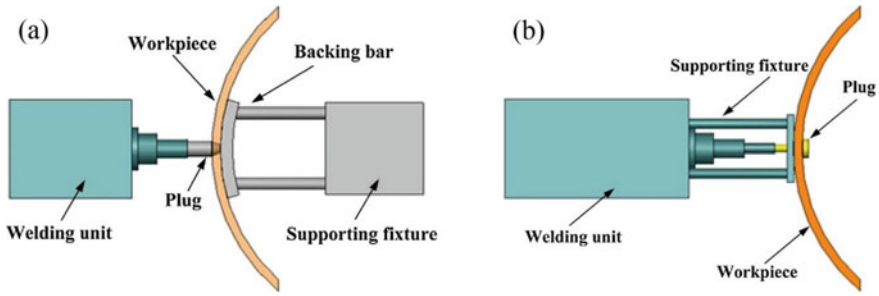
Schematics of FPW: a friction push plug welding and b friction pull plug welding [64]
